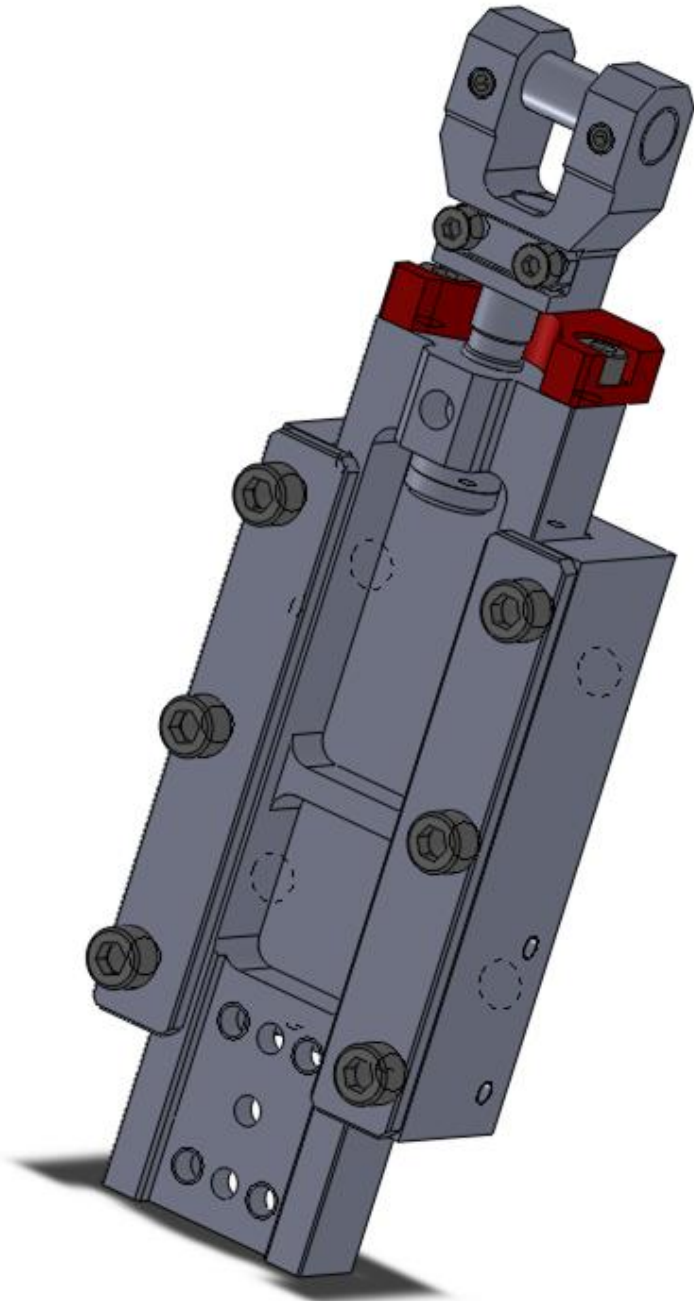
SPONSORS'S MECHANISM ASSEMBLY REAR VIEW.
